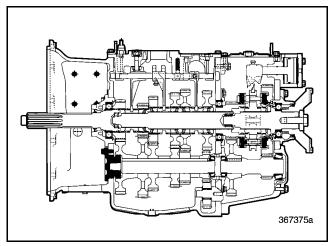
Front Countershaft Front Bearing Cover Component Locator
